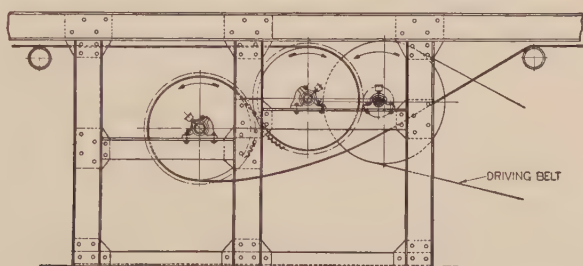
Tandem Drive on Return Run of Conveyor.
